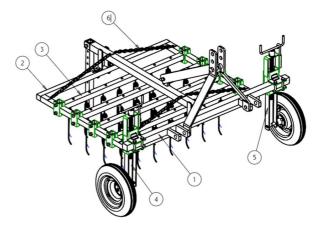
Drawing of garlic weeder for raised beds. (1) Main frame (2) tine frame (3) members (4) spring tine (5) depth control wheel and (6) link chain
